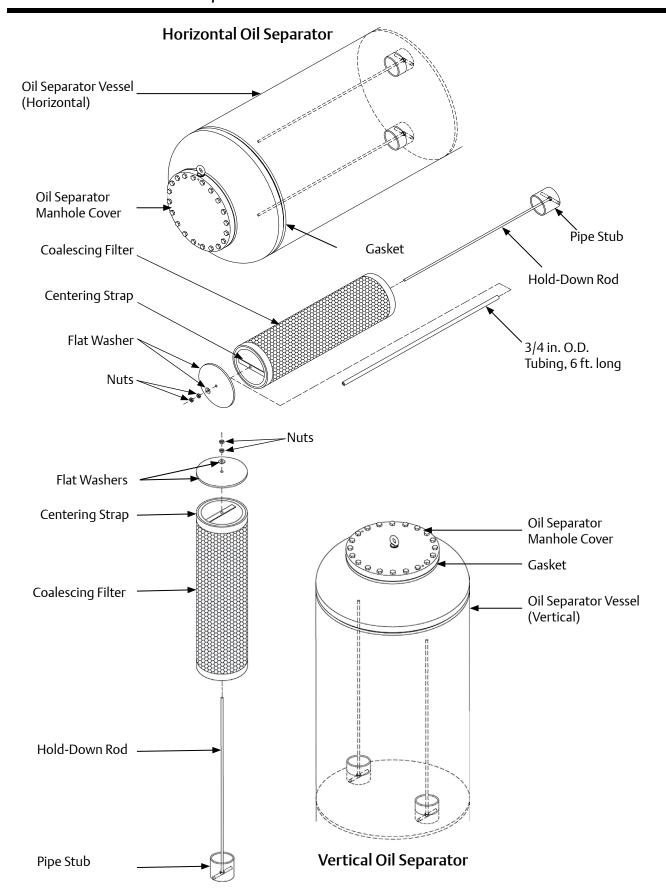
Oil Separators, Manhole Covers and Coalescing Filter Assemblies
